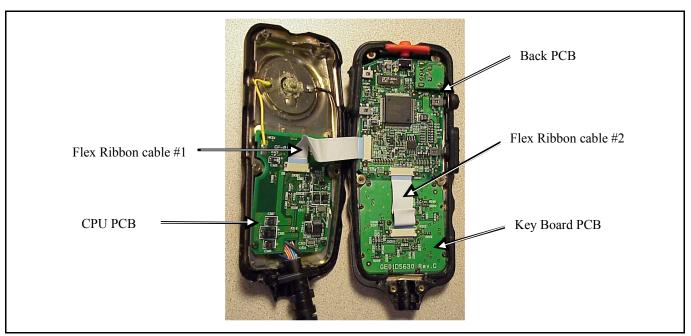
Location of PCBs and Flex Ribbon Cables
